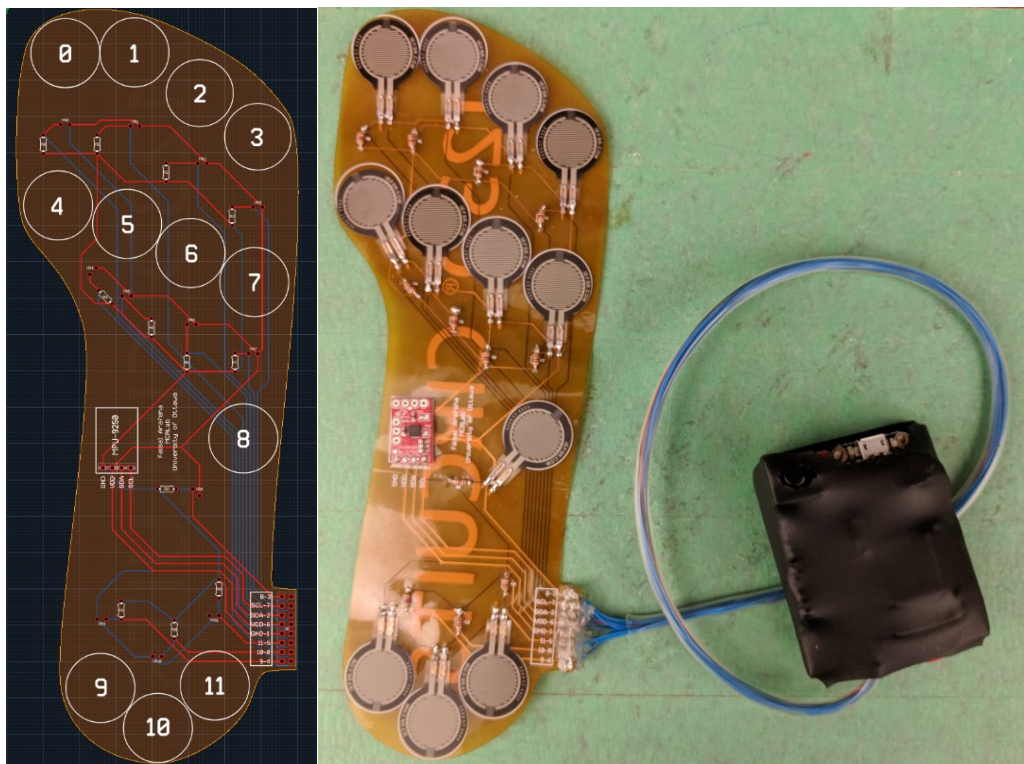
(left) PCB design of the male size US 9-10, (right) Picture of the final PCB with embedded FSR and IMU sensors, and the package containing the microcontroller, battery, and multiplexer.
